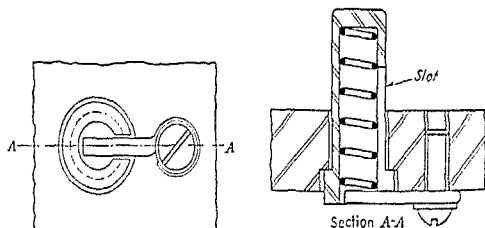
Disappearing guide.¹ (Ford Motor Co.)
